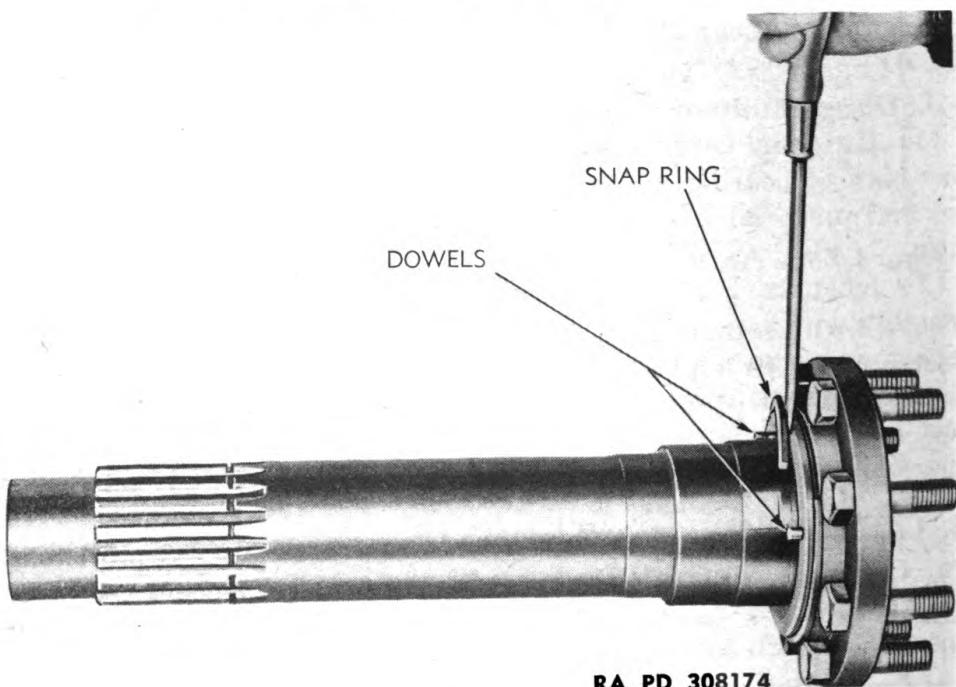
Removing Sprocket Hub Bolt Retaining Snap Ring
